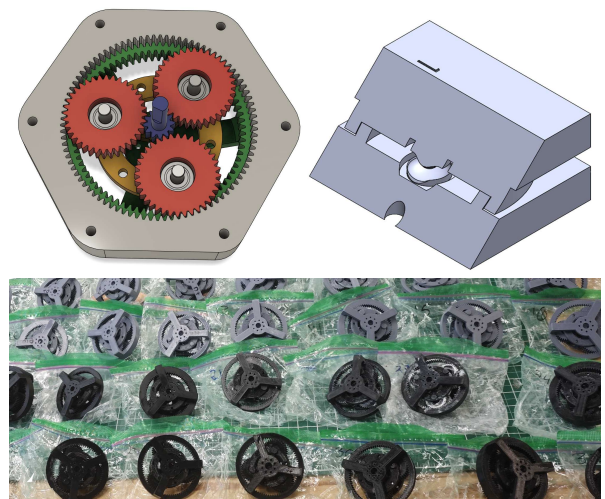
(left) Case study 1: 3D-printed Wolfrom gear. CAD includes design parameters in planet gears (red), sun gear (blue), stage 2 ring (green), and carriers (gold). (right) Case study 2: injection-molded soft valve. CAD of valve mold includes design parameters in domed valve and thickness. (bottom) Assembled PLA (grey) and ABS (black) 3D-printed gears after sequential experimentation. Gear outer diameter of 84 mm.
